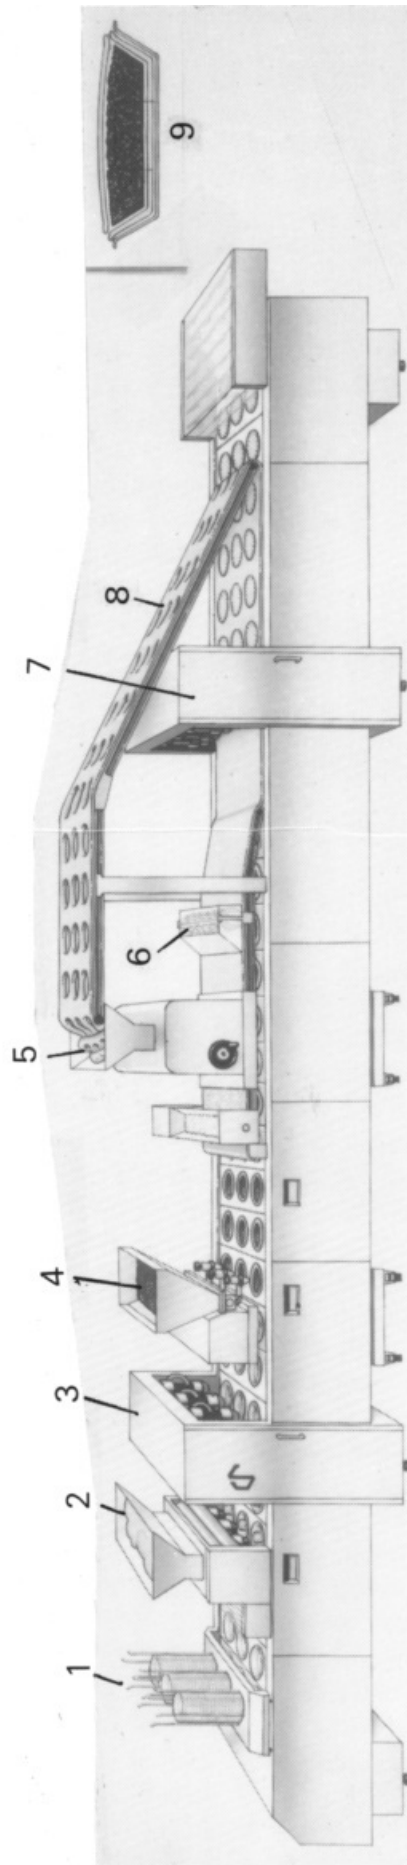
Pie manufacture: 1, foil dishes; 2, dough divider; 3, blocking unit; 4, filling depositor; 5, pastry lid sheeting machine; 6, rotary lattice cutter; 7, crimping/lidding unit; 8, scrap return conveyor; 9, pie cross section.
